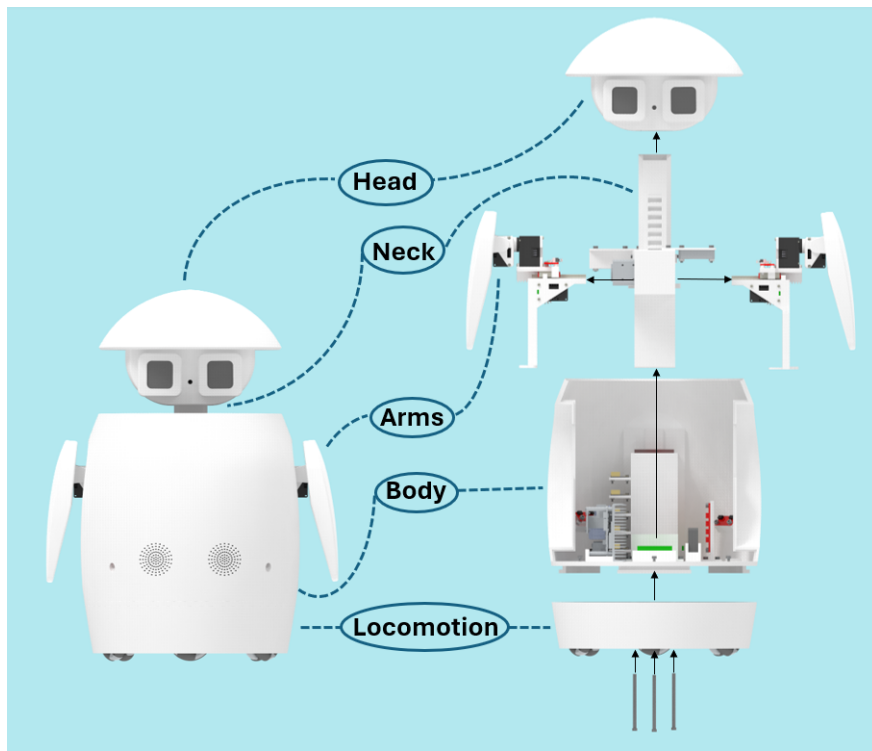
Fully assembled AKI to the left and exploded view to the right with the subsystems marked out
